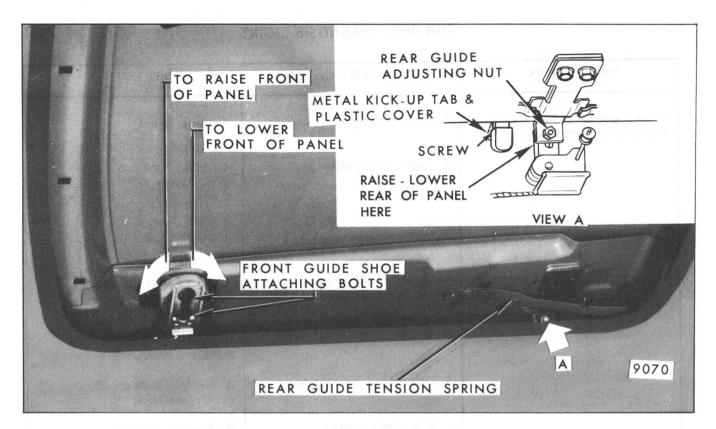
Sun Roof Panel Vertical Adjustment Provisions
